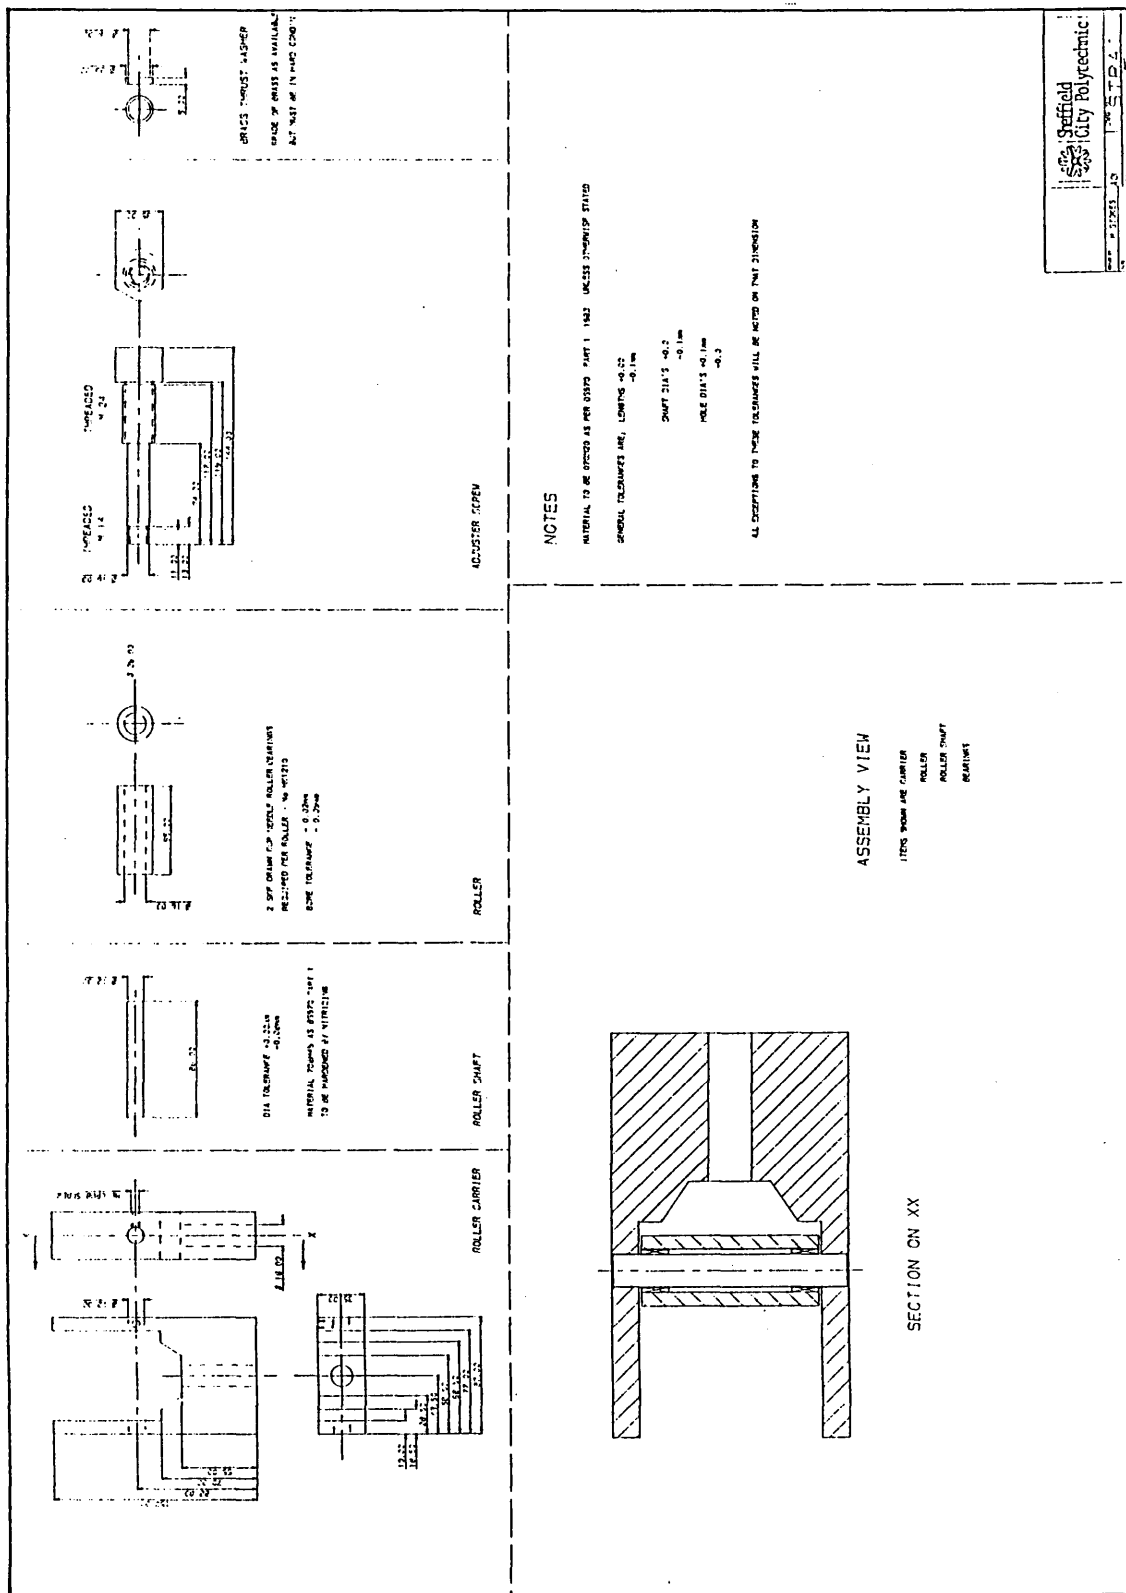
Detailed drawings of the roller leveller frame.
